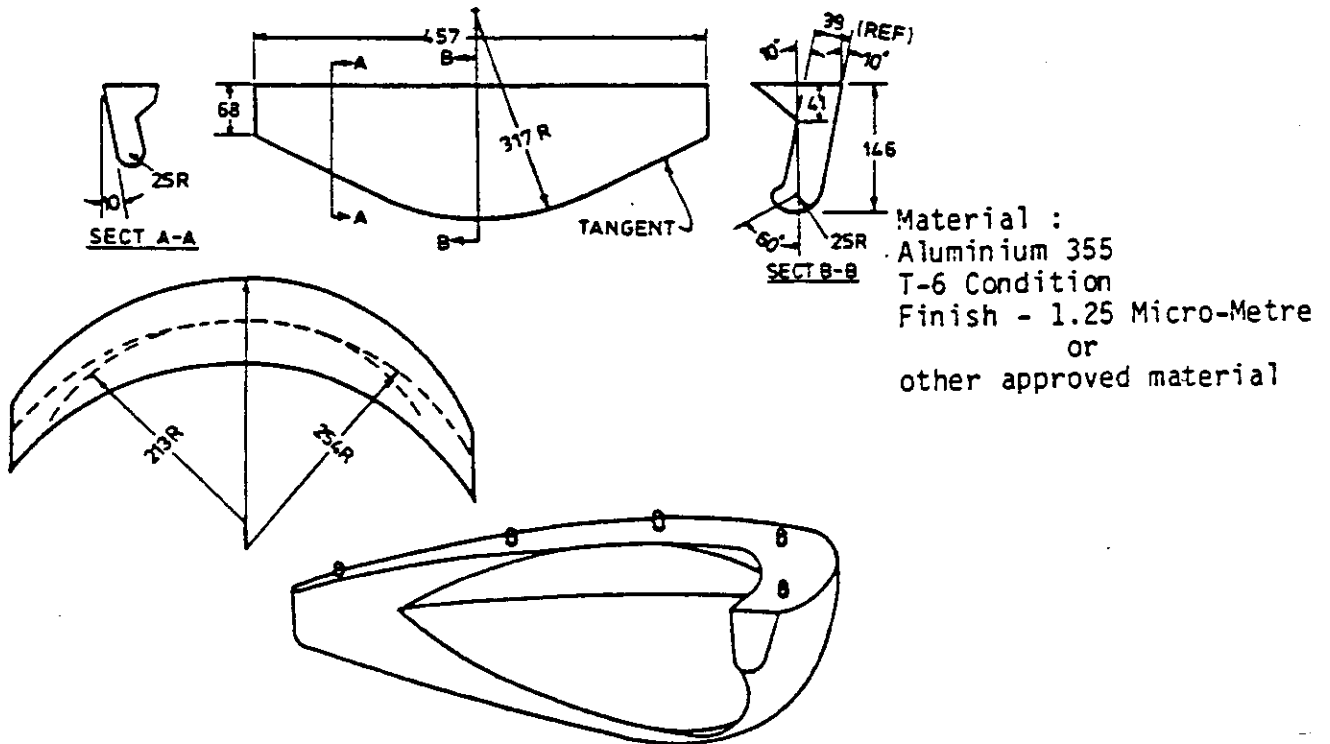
Diagram of Bead Unseating Block (Dimensions in mm)
